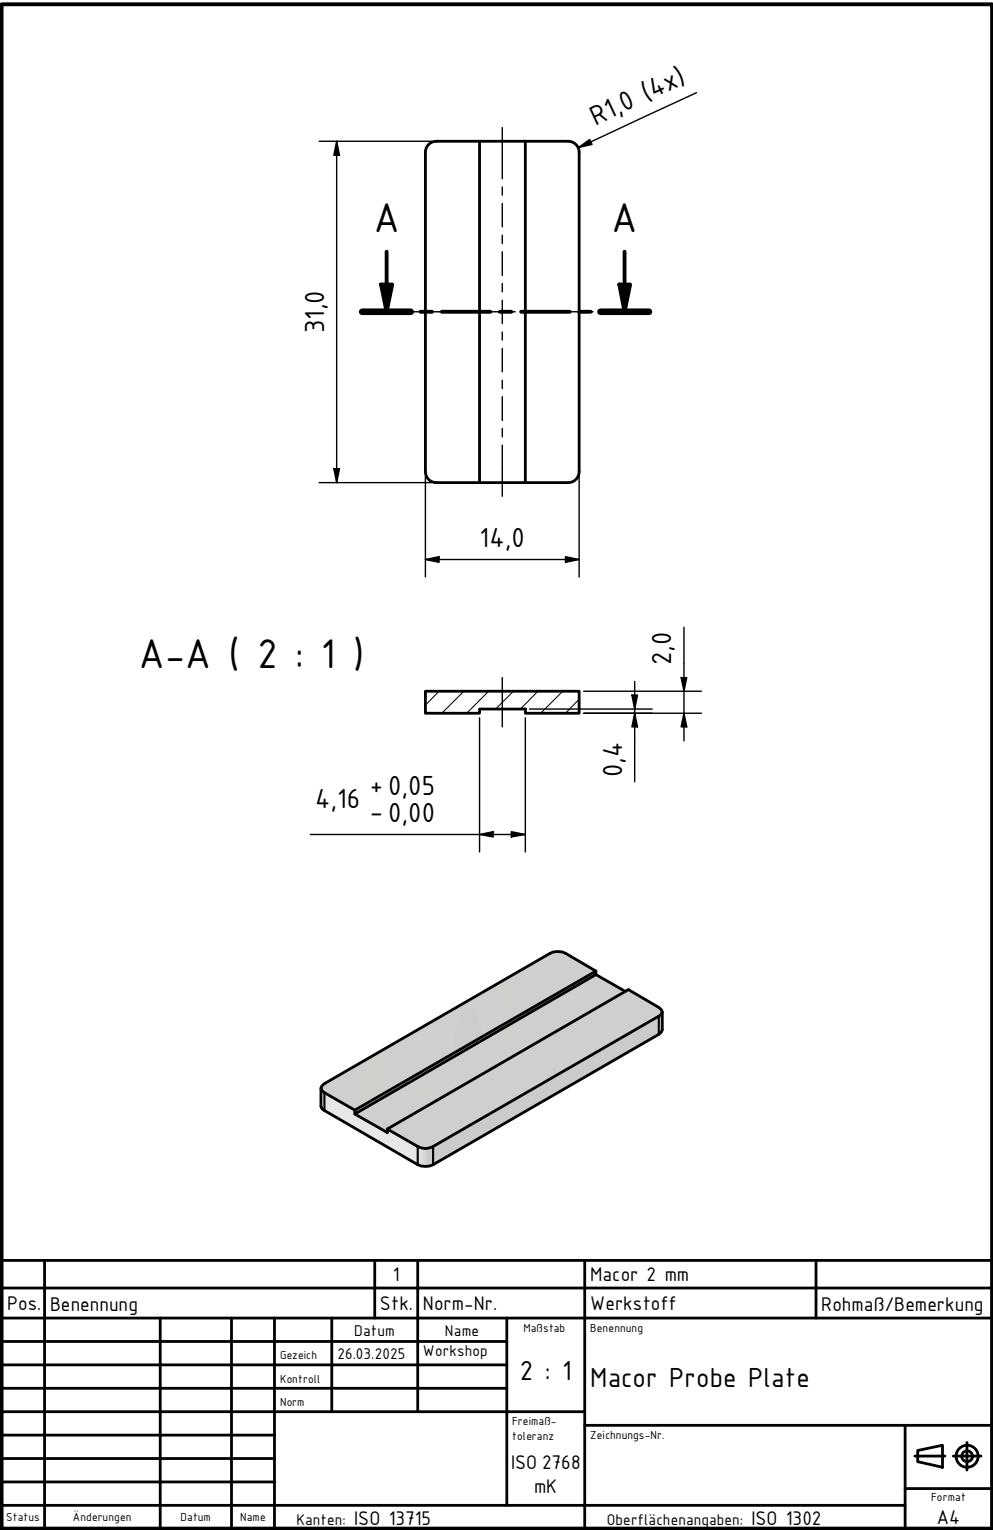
MACOR[®] probe plate component of the sample holder V2. Designed in cooperation with Mechanische Werkstatt (Atominstitut, TU Wien); final drawing by Heinz Matusch [75]
